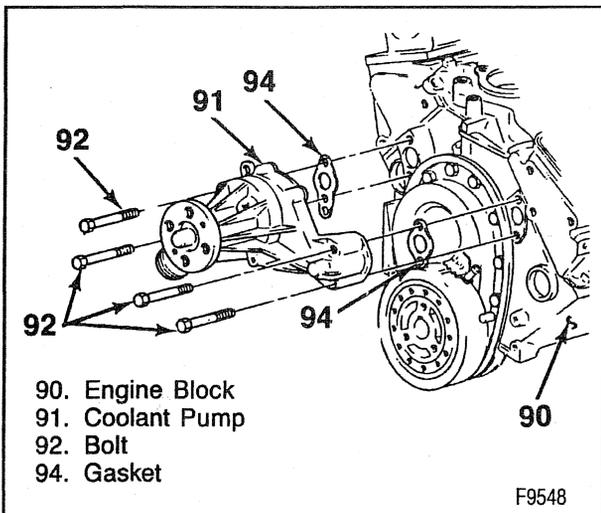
Coolant Pump and Components (5.0L and 5.7L Engines)
